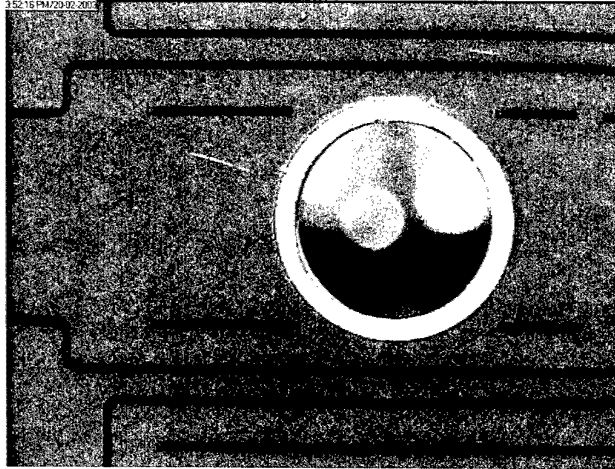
A close-up of a thin load bearing sensor installed over a rivet. This sensor is able to detect cracks 1.5 mm in length and is 125 μ m thick.
